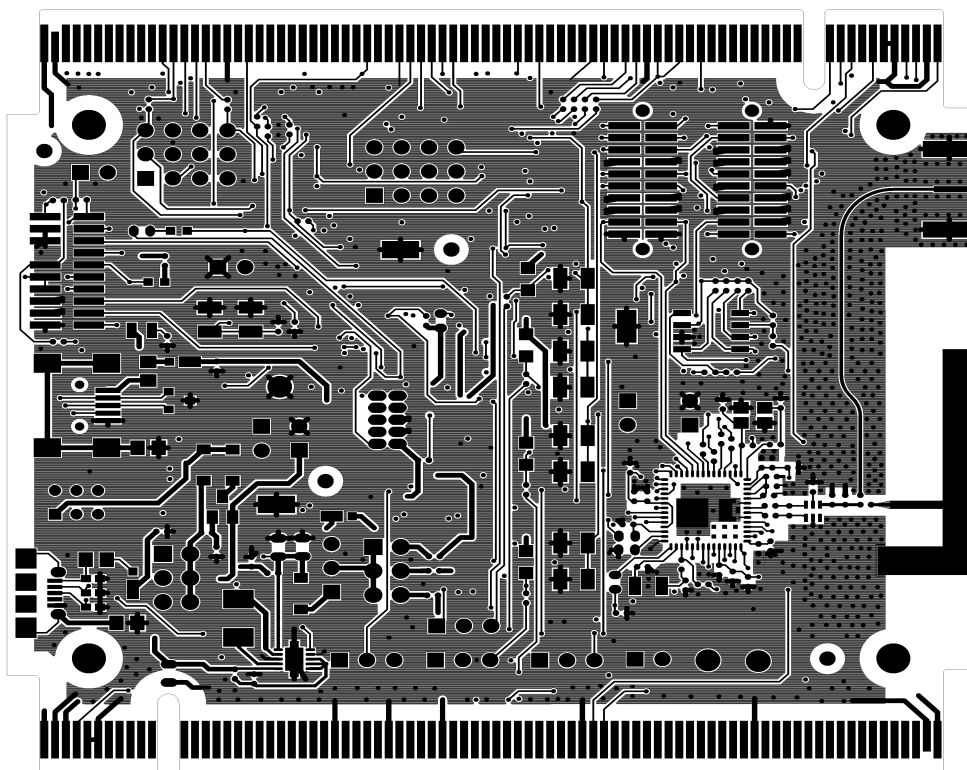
TWR-KW24D512 Reference Board PCB Layout (Top View)
